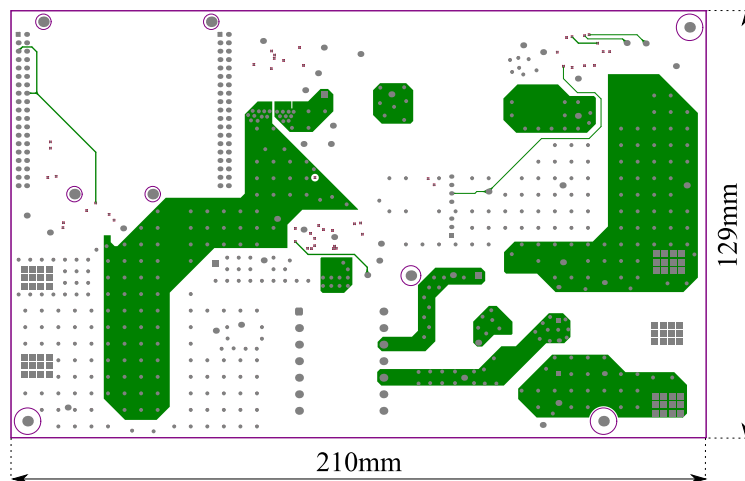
Layout of the first inner layer of the PCB prototype.
